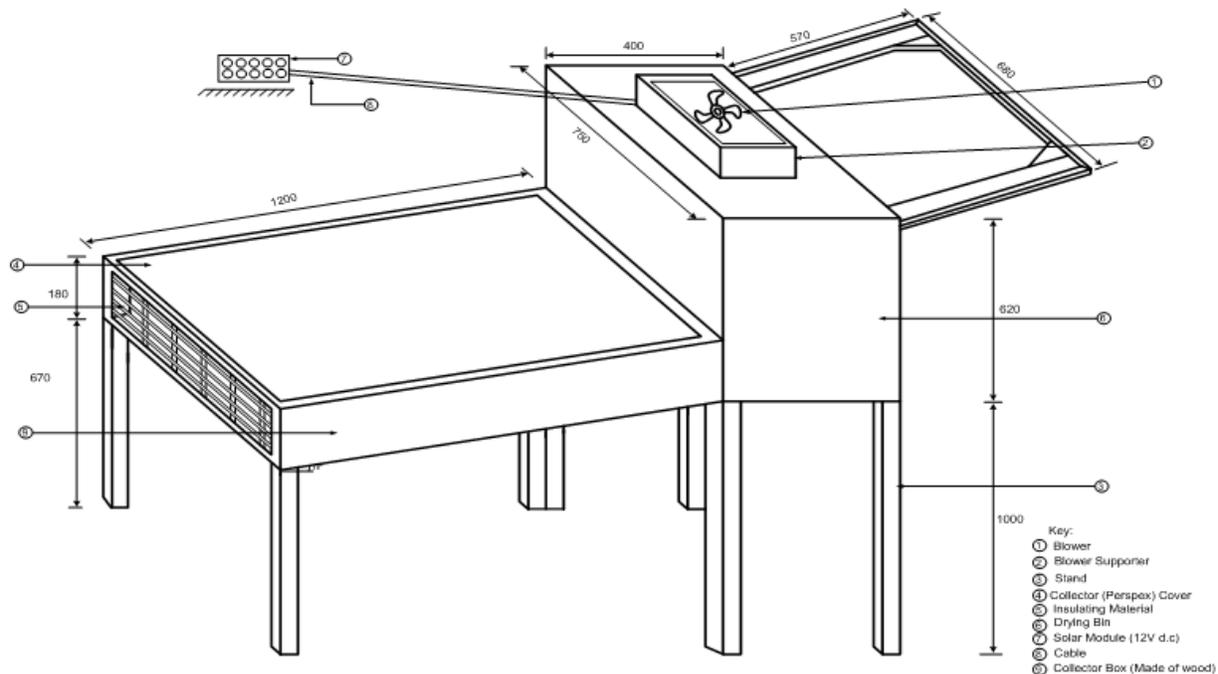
Constructional View of the Solar Dryer (All dimensions in millimeters)
